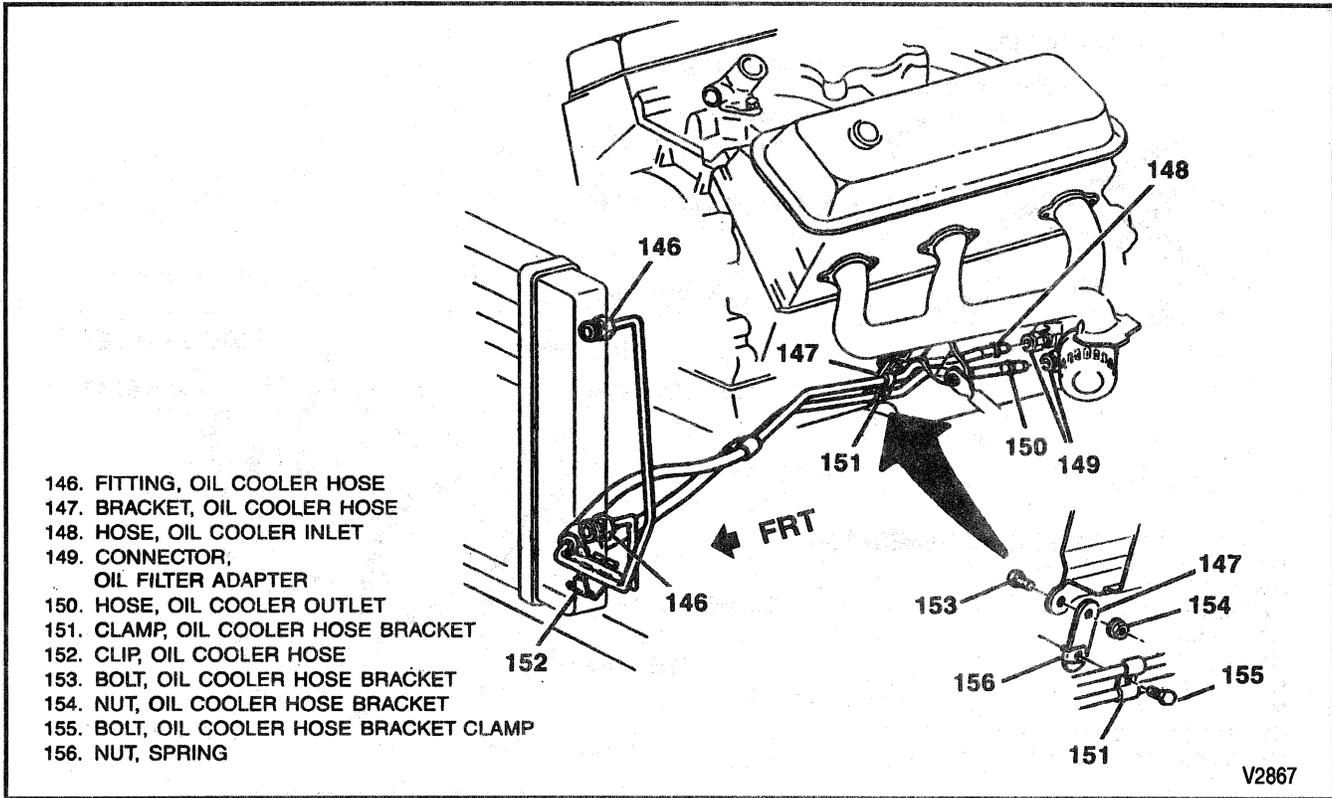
Engine Oil Cooler Lines and Components (4.3L Engine with Engine Oil Cooler)
